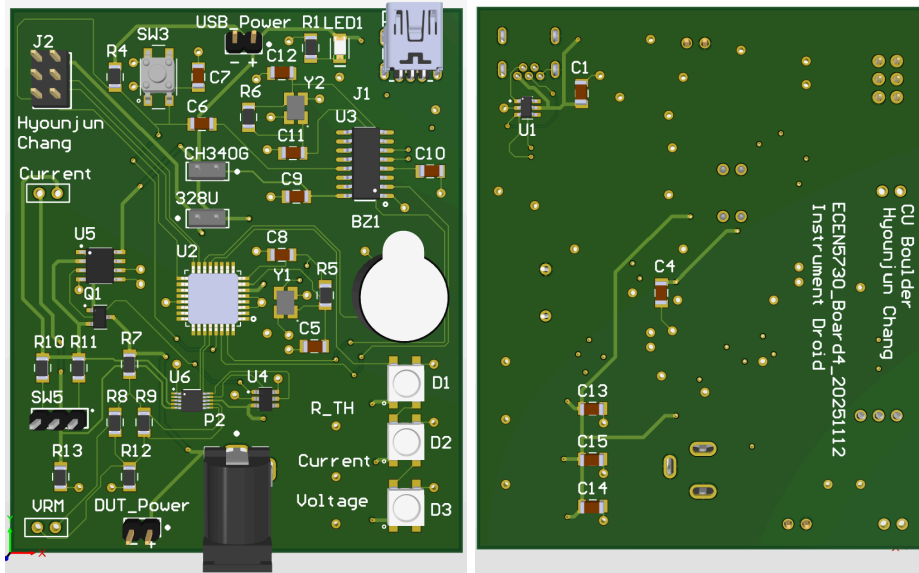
PCB Design on Altium Designer 3D Front View (Left), 3D Back View (right)
